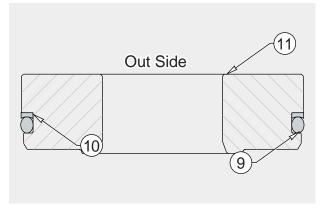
The o-rings always have to be assembled from the pressure facing side.
